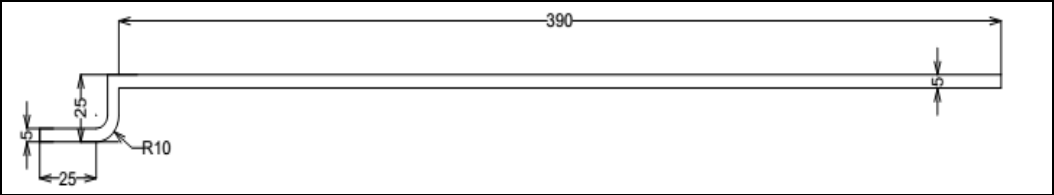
CAD drawing of Cross Trainer mechanism for prototype.
